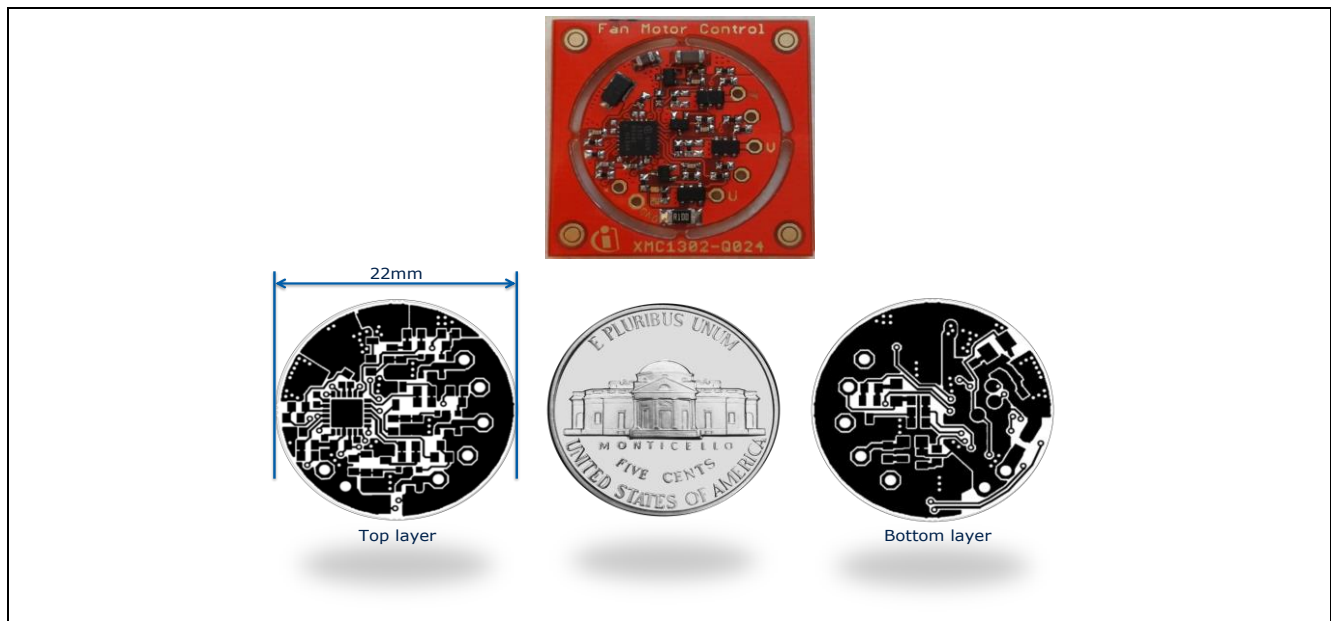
Diameter 22 mm with 2 layer Circular PCB layout
